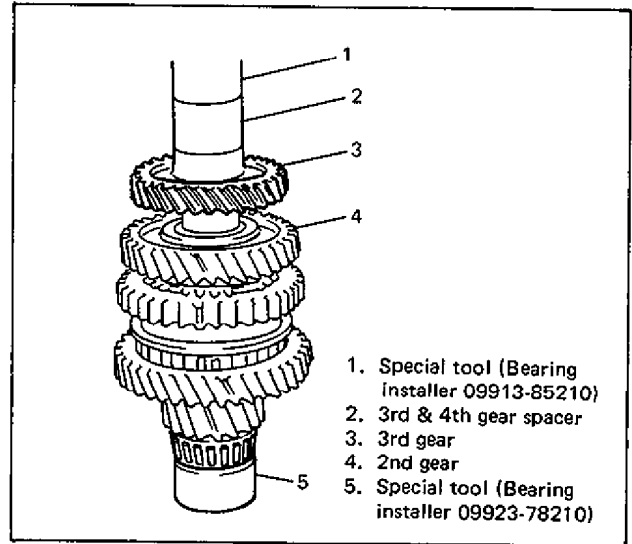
A-59 Press-fitting 3rd Gear and Spacer
